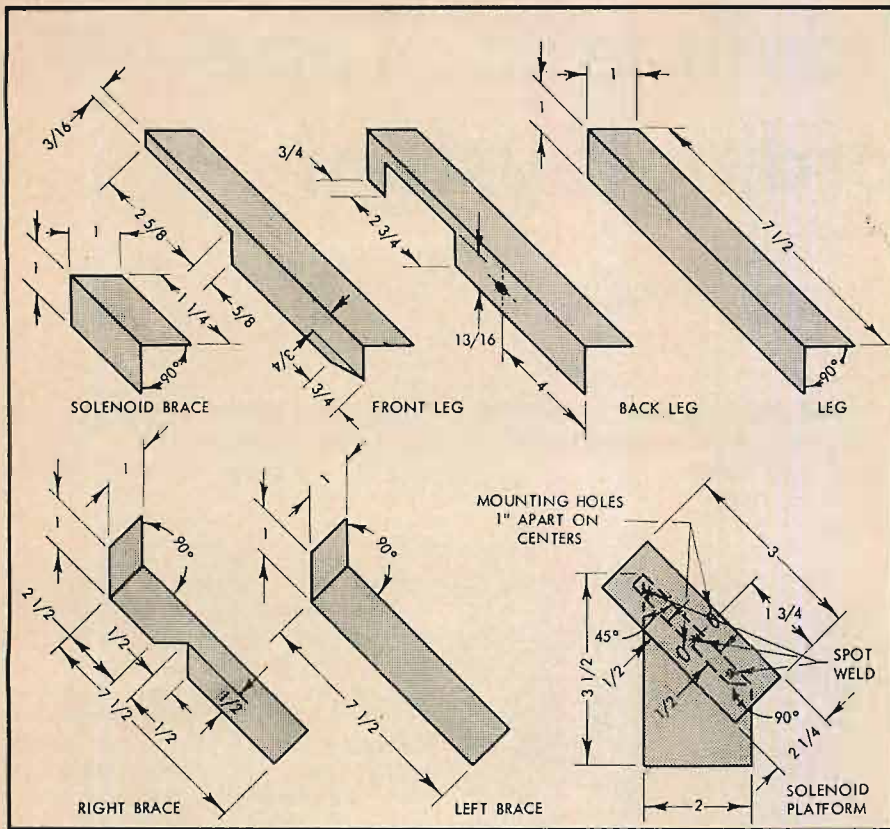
Dimensions of the legs, braces, and solenoid platform. Elongate the solenoid mounting holes and the linkage mounting hole in the back leg.
